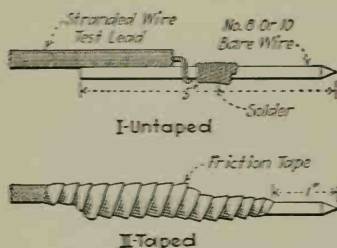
Test-lead "feeler" made from a piece of heavy wire.
